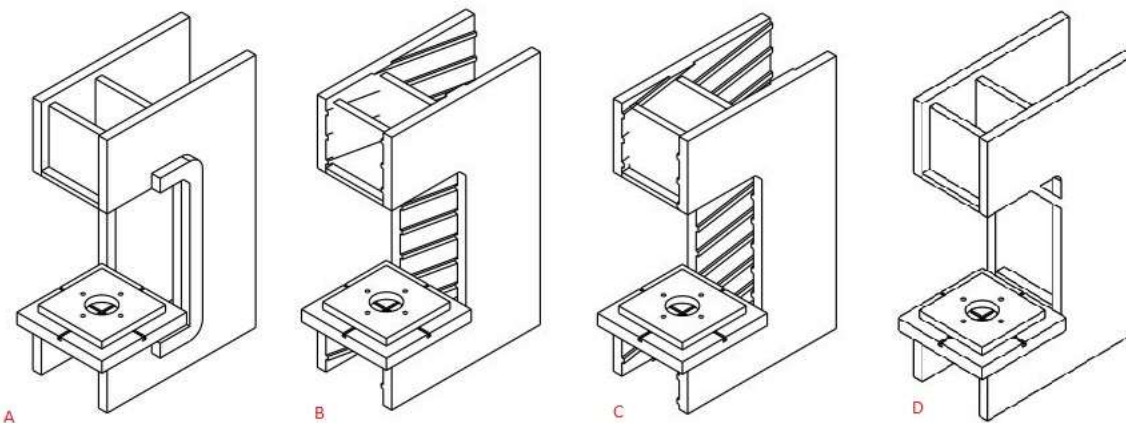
Press Frame A. C- Fillet Plate B. Right angle Ribbing. C. Left angle Ribbing D. Inclined plate at upper side
